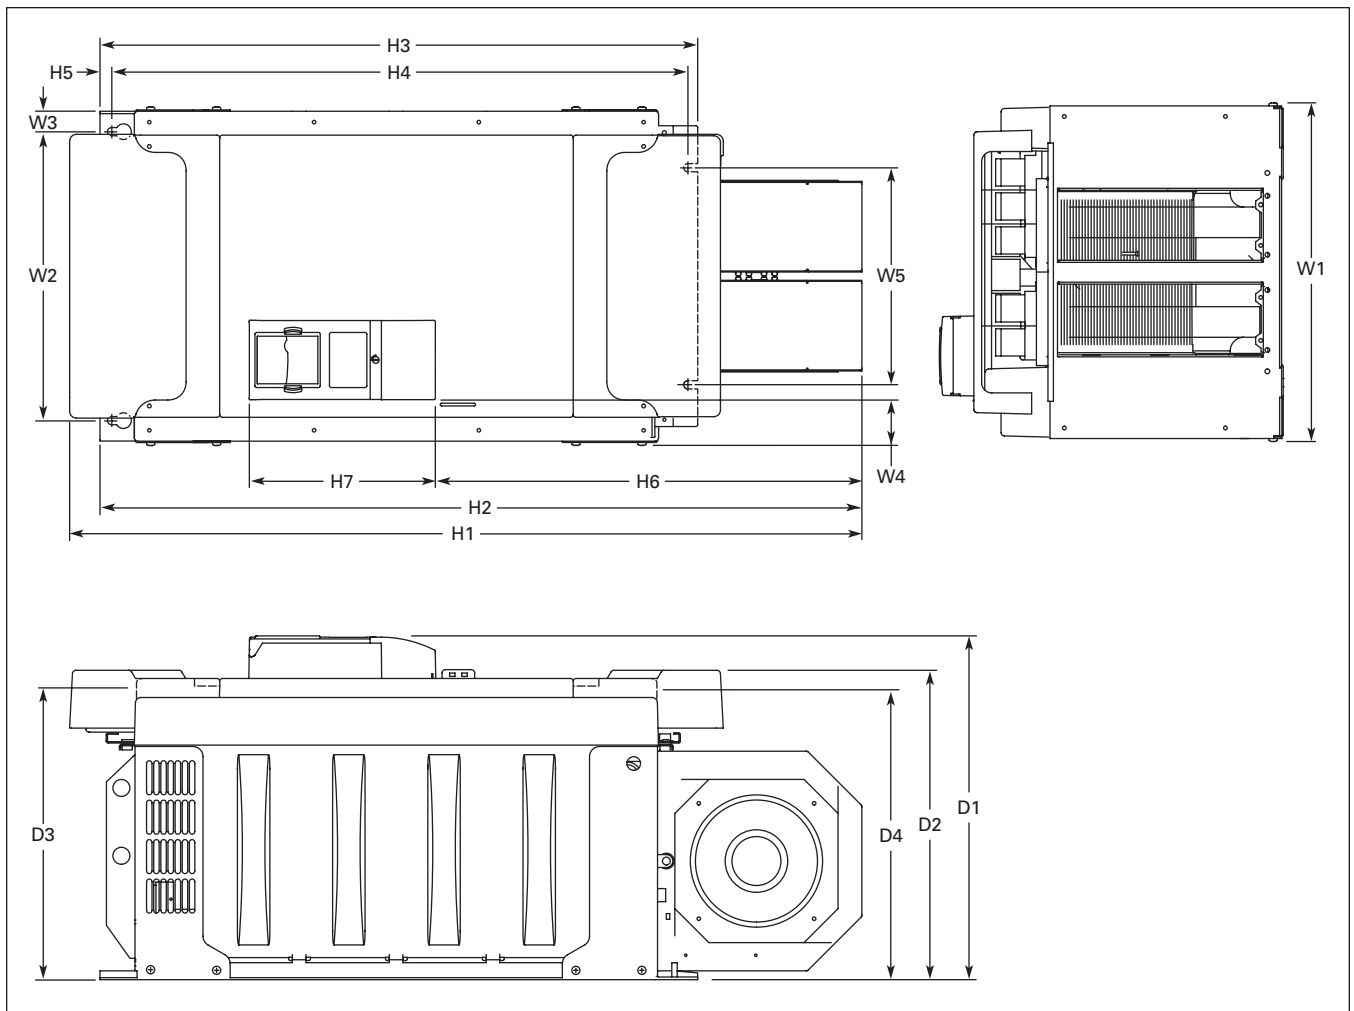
HVX9000 Dimensions, FR10 Open Chassis
